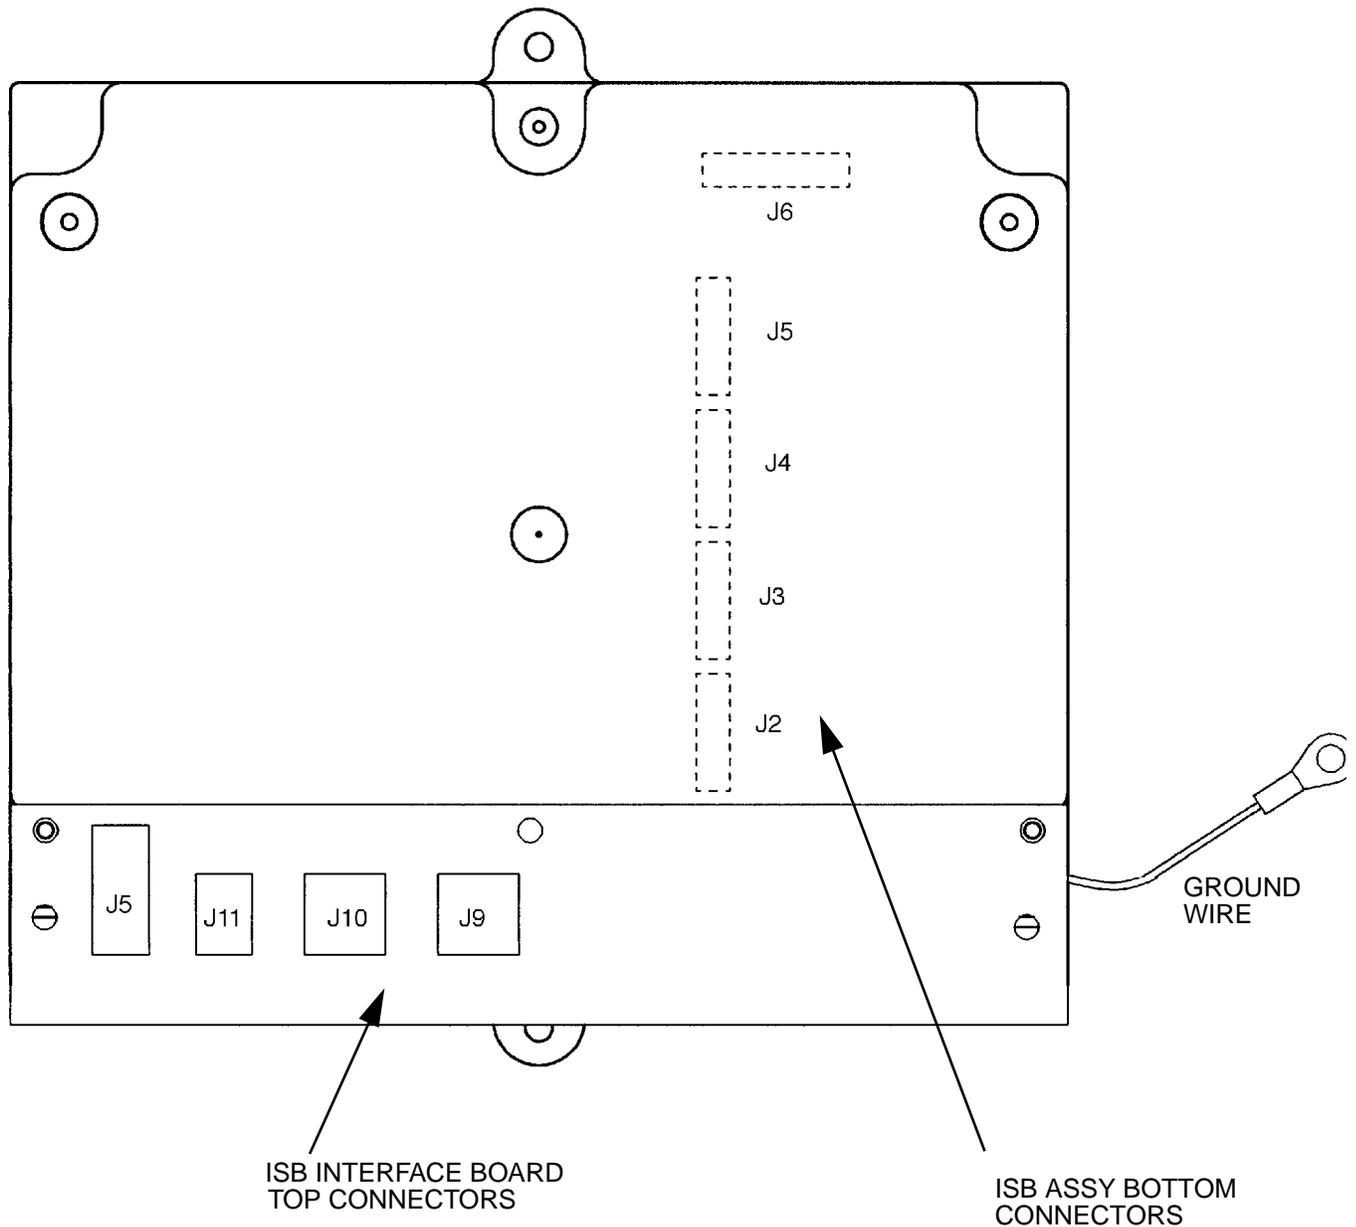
INTRINSIC SAFE BARRIER ASSEMBLY. The ISB ground lug shown must be connected directly to the dispenser chassis at the electronic head base angle with no other wires terminated at this location. The components of the ISB assembly are not separately replaceable. If failure occurs, replace the whole ISB assembly. Note that the ISB Interface board, which mounts on top of the ISB assy, is not shown here since it is not part of the assembly.
